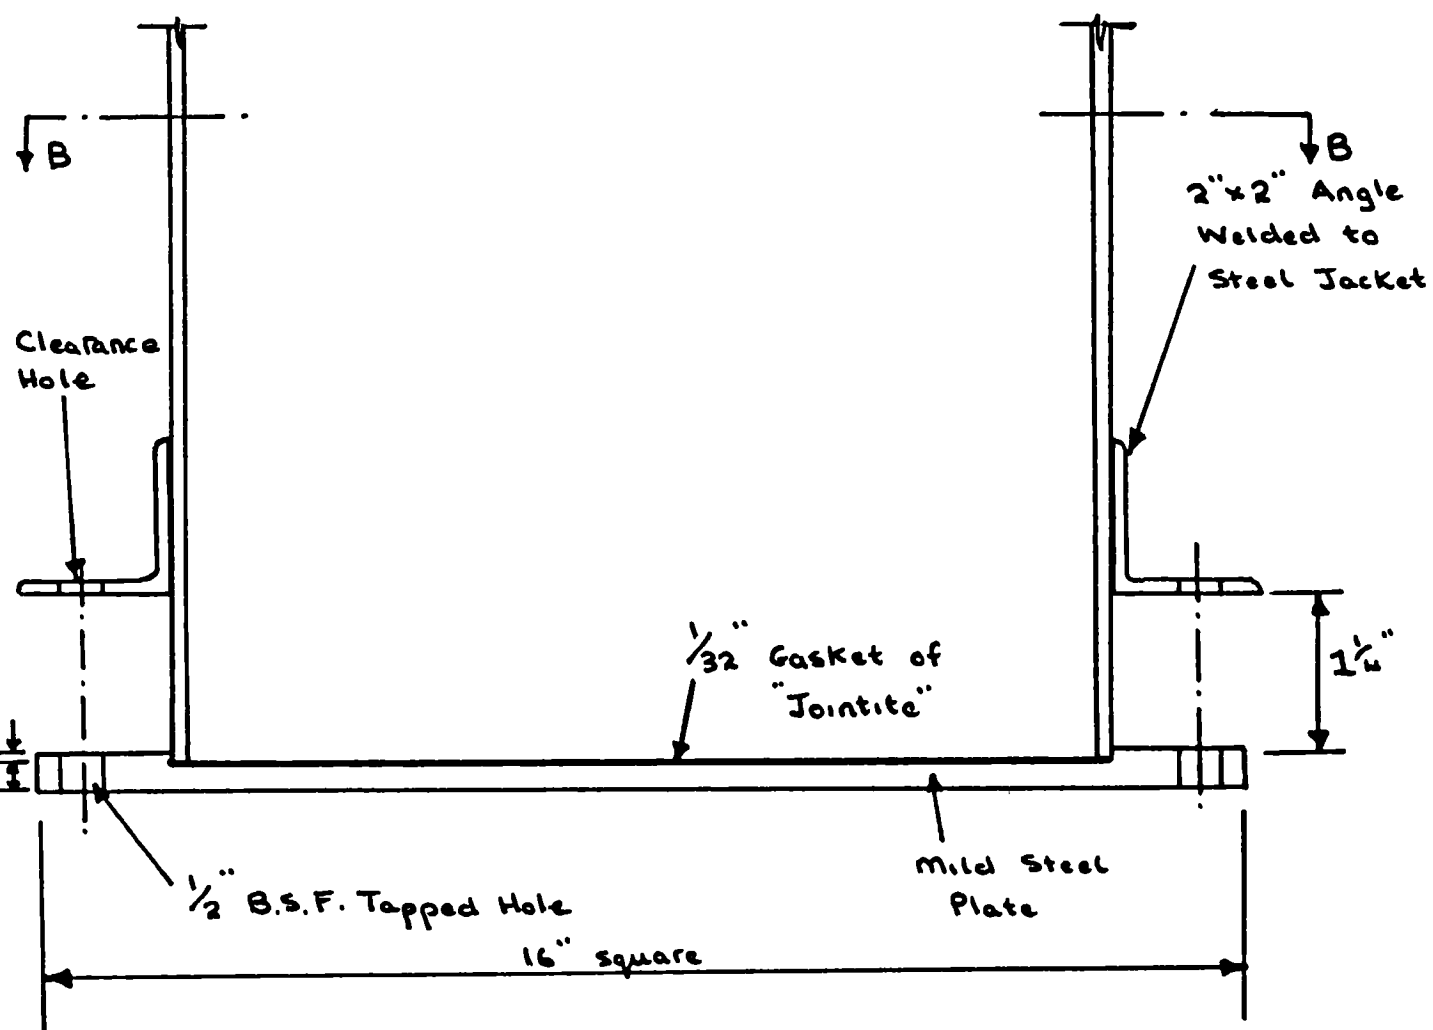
Section A-A showing in elevation of details of Steel Jacket anchored to Base Plate.
